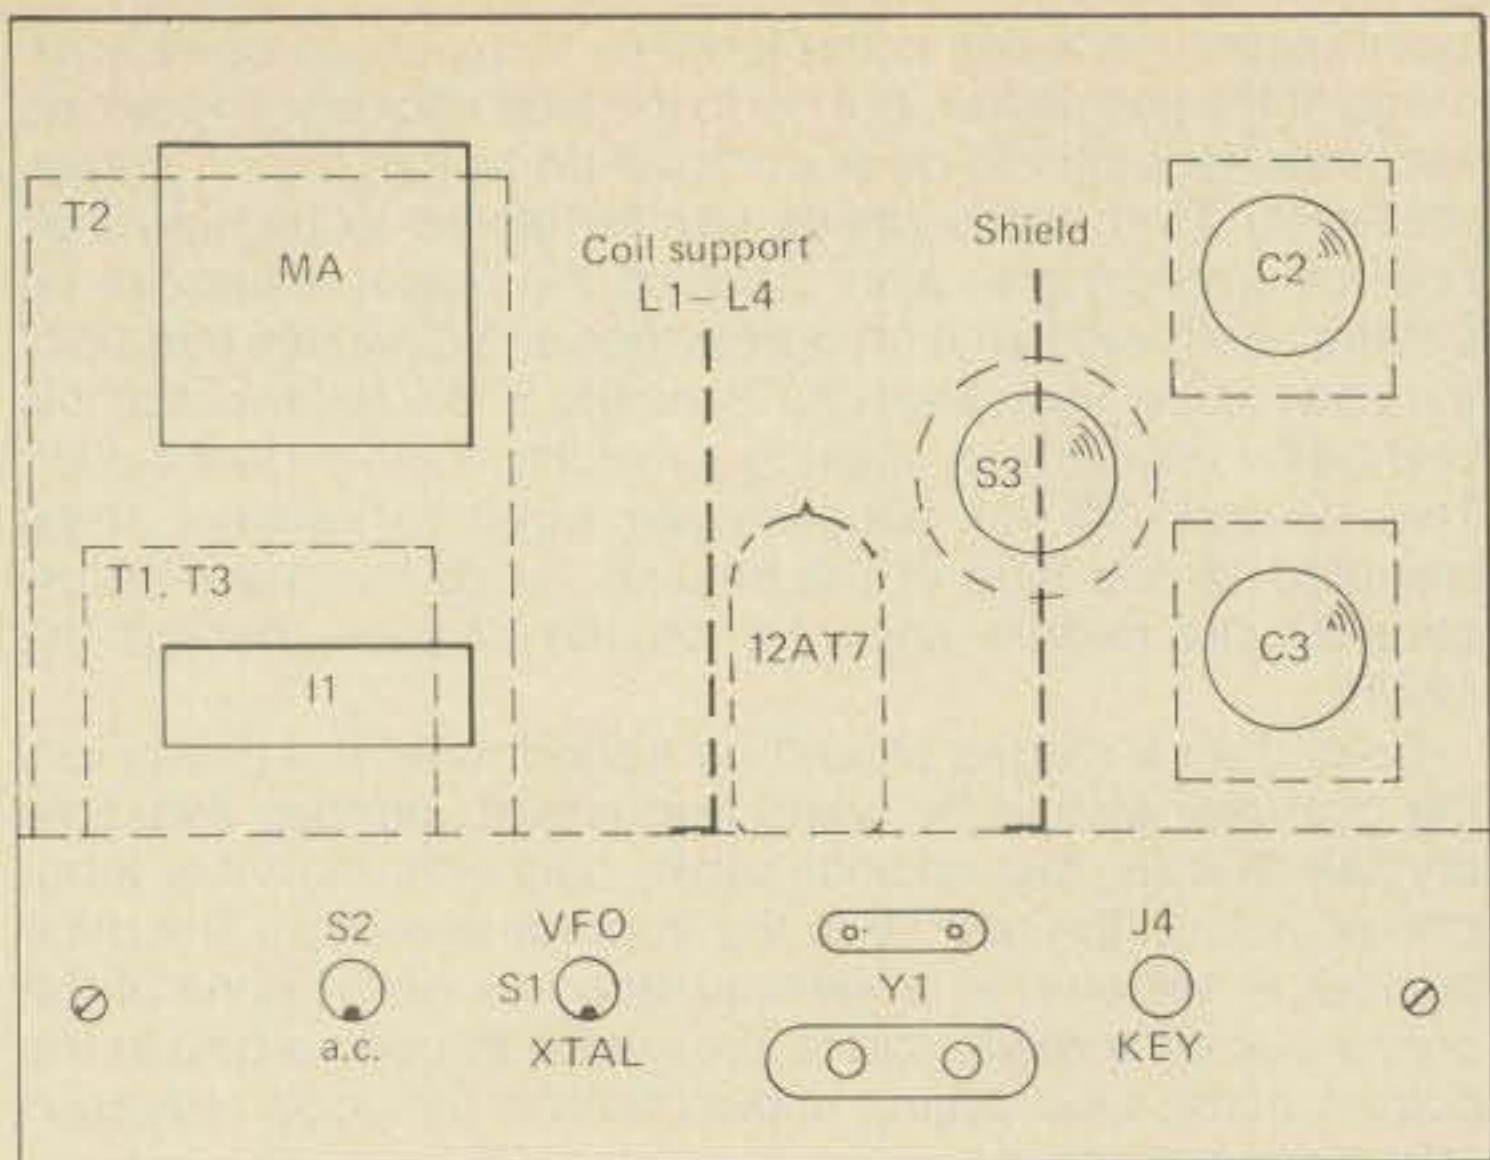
Sketch of front panel layout with partial view of components mounted behind front panel. Solid lines represent parts on the panel; dashed lines represent parts behind the panel. Panel size: 9"x7".
